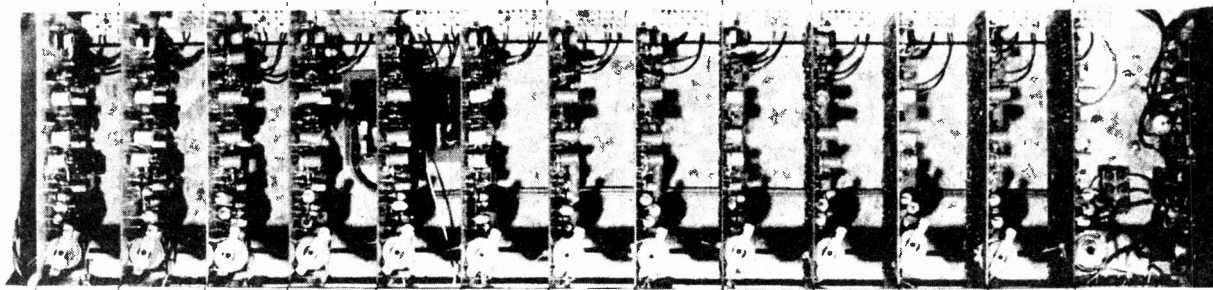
Construction details of pitch p.c.b. frame. Note that a cutout in the side panel should be made to allow access to preamp/tremolo controls
